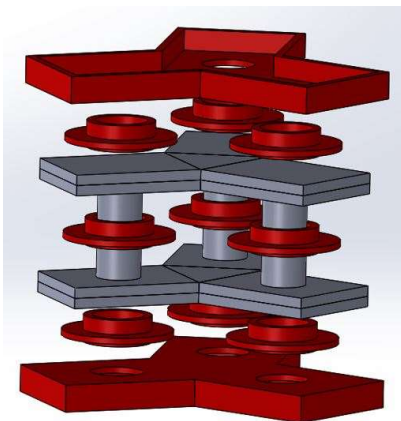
Exploded view of the magnetic component (grey) and its plastic supports (red)
